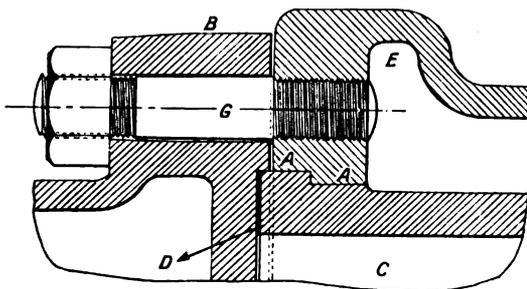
Detail of Joint between Liner, Jacket, and Breech Casting.
